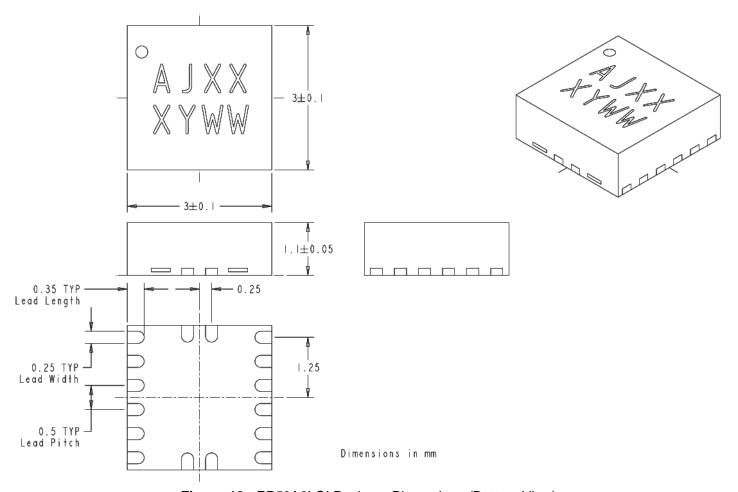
EP53A8LQI Package Dimensions (Bottom View)
